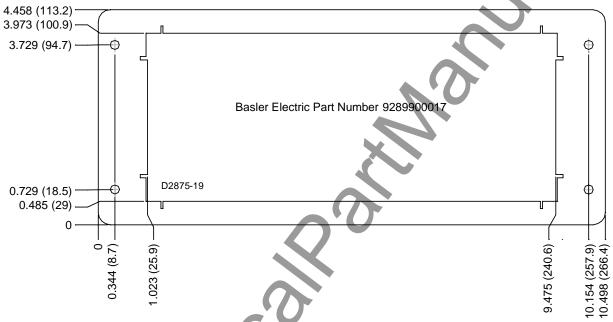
H1 Case, Single Relay Mounting Plate Dimensions
